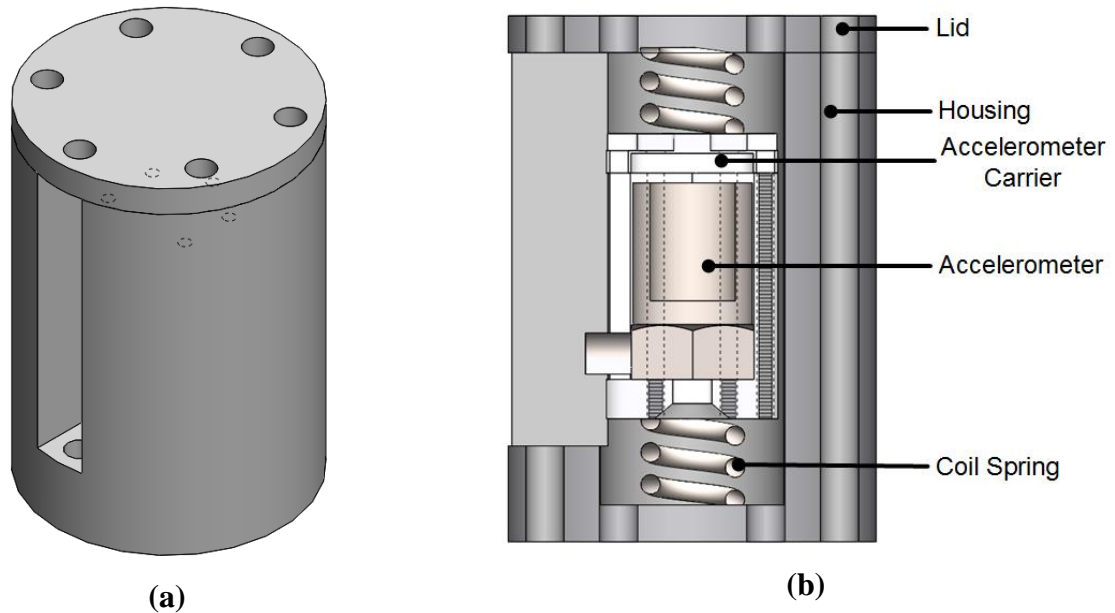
Isometric (a) and Section (b) Views of Spring Mount
